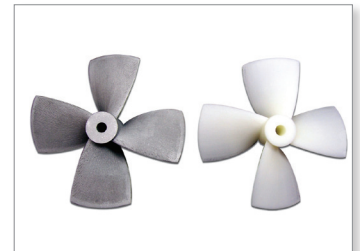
Investment casting (left) made from FDM pattern (right) eliminates tooling for molding of wax patterns.
